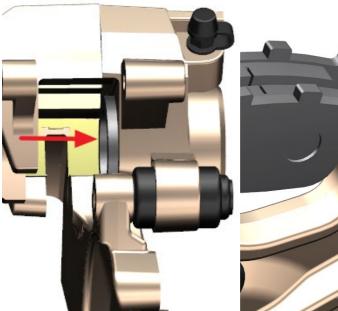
Rear wheel, swinging arm component		Change rear brake arresters	CHK	0
